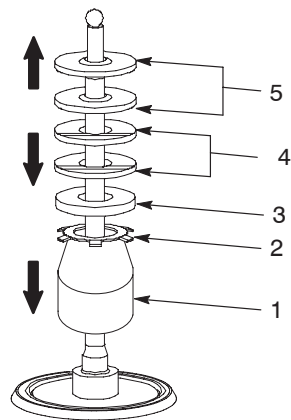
Assembling the seal tool, retaining ring, seal support disk, and hat seals on the needle-and-piston assembly
